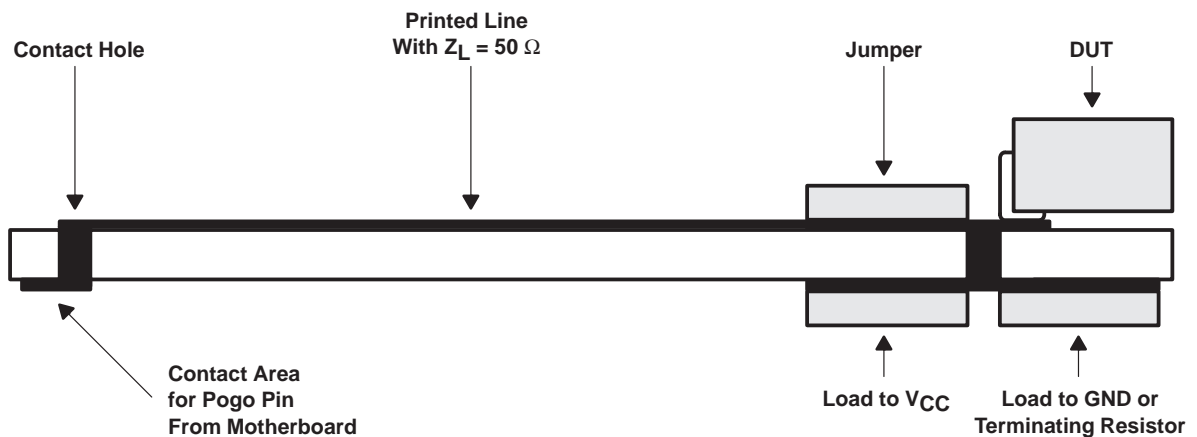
Cross-Section of the SN74ACT7801FN DUT Board, With the Printed Line and the Position of Passive Components for One Input or Output
